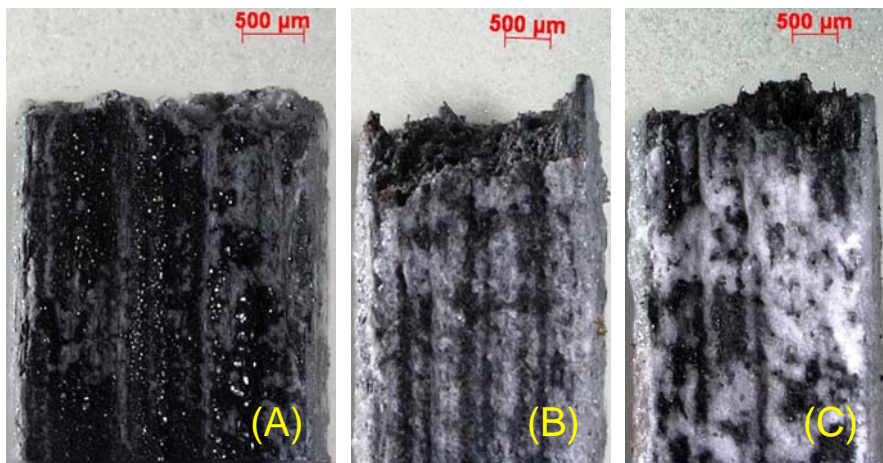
Fracture surfaces of composite C2 specimens fatigued in a steam environment at 1300 °C, Maximum Fatigue Stress Level: (A) 180 MPa, (B) 160 MPa, and (C) 140 MPa.
